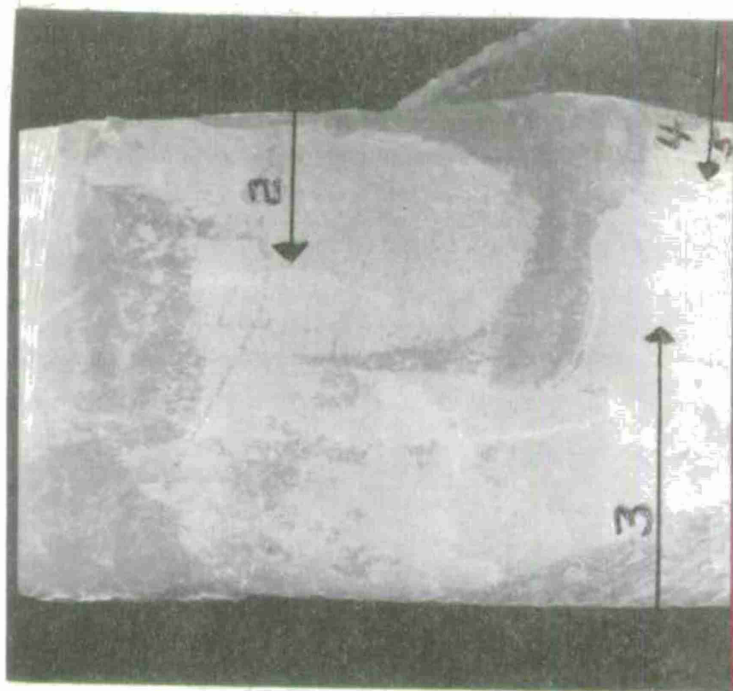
Fracture surface showing various regions which were examined at highest magnification for a specimen tested in fatigue in zinc stearate at 675°F.
